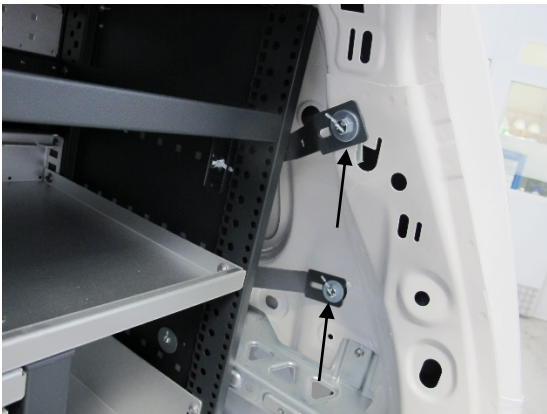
Principle illustration, view of a bolted connection on the inner panel with stable insert plate
